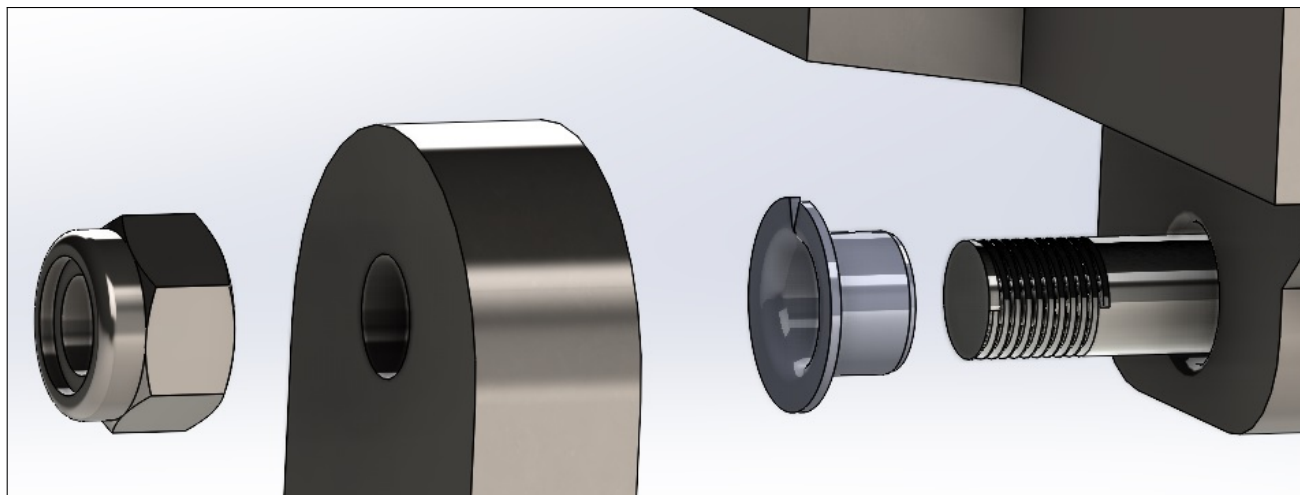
Exploded view of main joint, with DP4 flange bushing and locknut.
